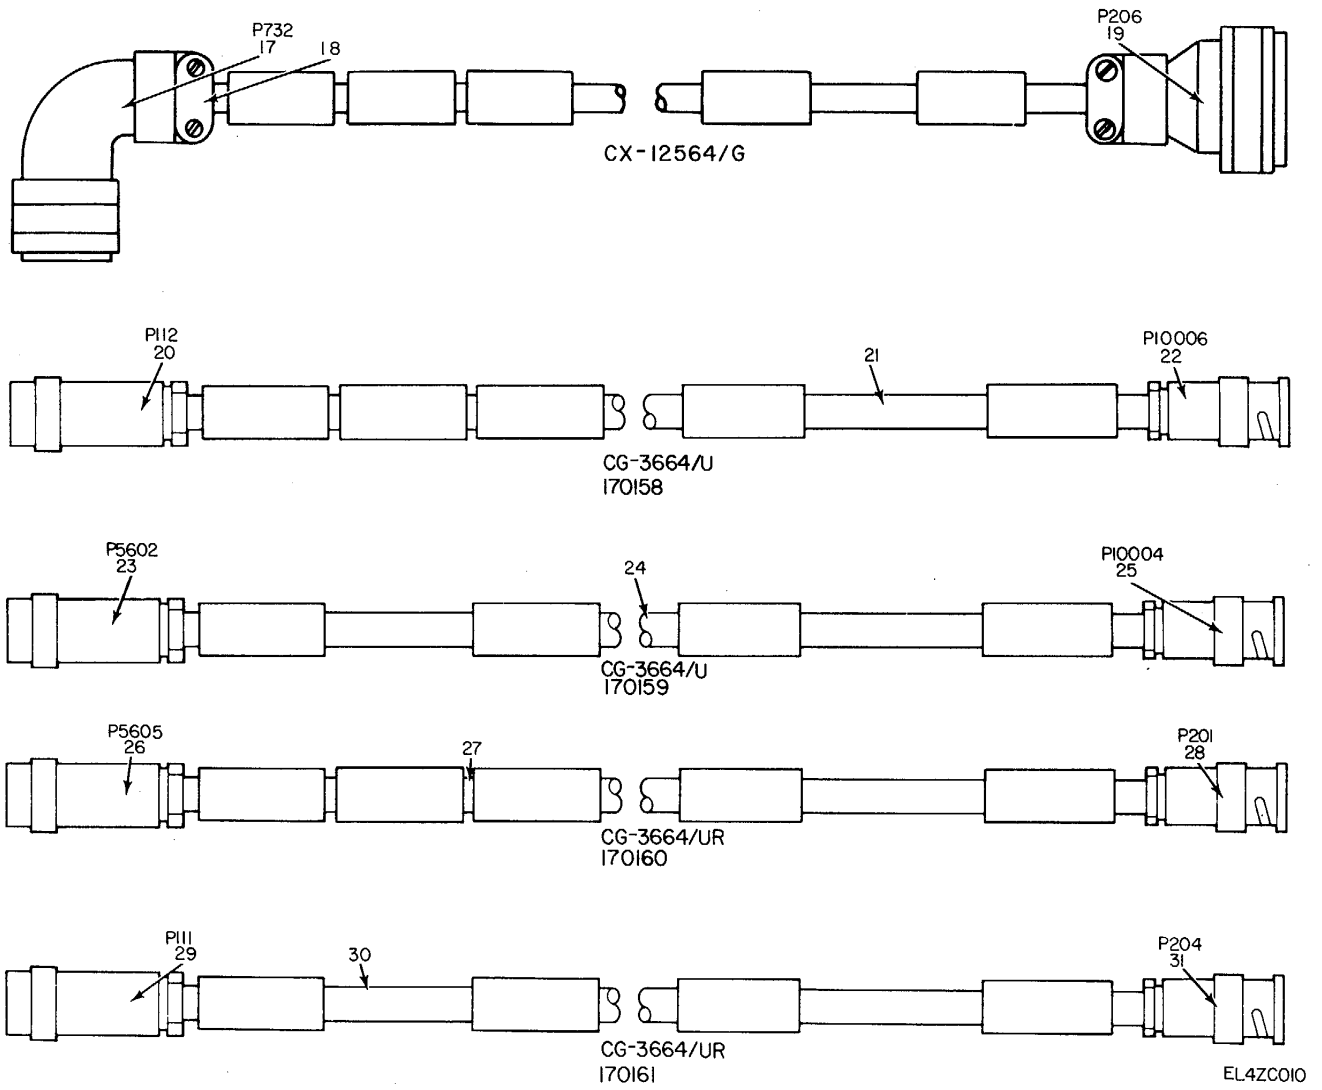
Cable Assemblies, RF and Power (Sheet 2 of 2).
